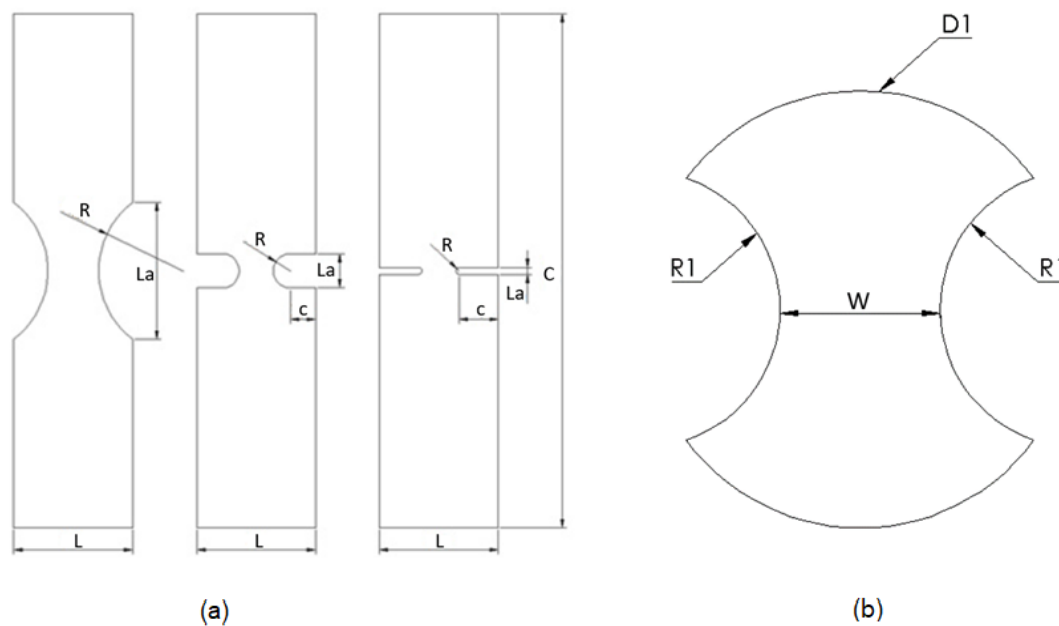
Specimen dimensions: a) Notched tensile test specimen b) Nakajima test specimen
